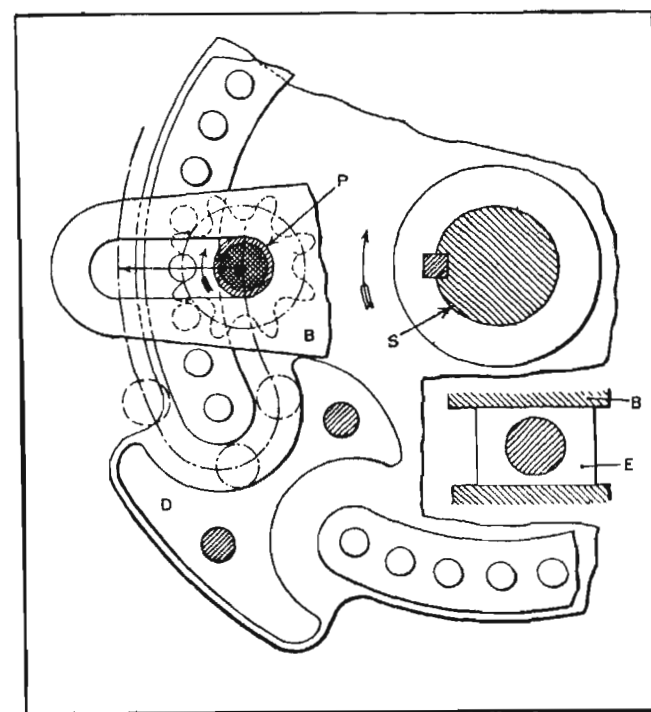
Pin Type of Mangle Gearing for Reversing Rotation of Driven Shaft *S
